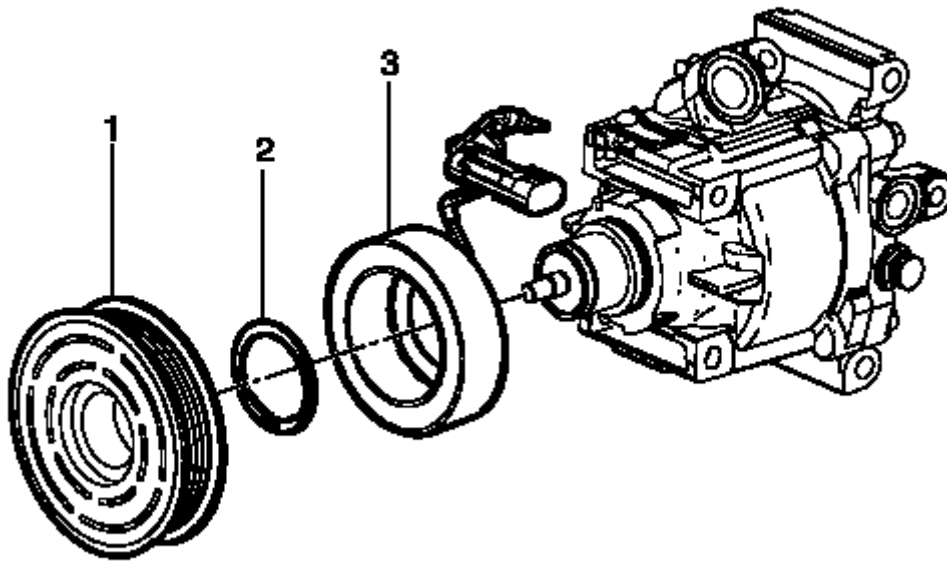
Compressor Pulley And Compressor Clutch Coil
